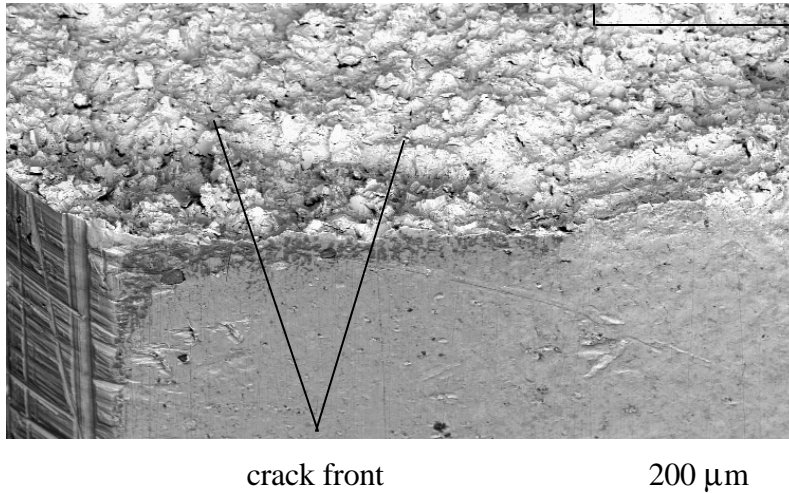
Residual fatigue life sample with fracture surface shown at 45° to the fatigue loading axis. ( $N_f = 3,055$  cycles – failure from fretting nucleated crack) Note location of crack tip prior to uniaxial fatigue testing.
